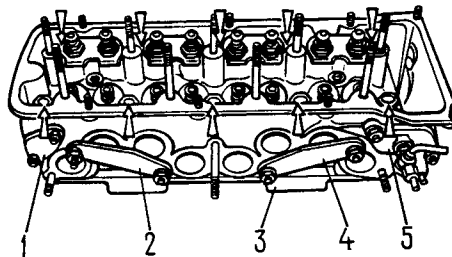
Checking Cylinder Head for Tightness on Tester A.60334:
